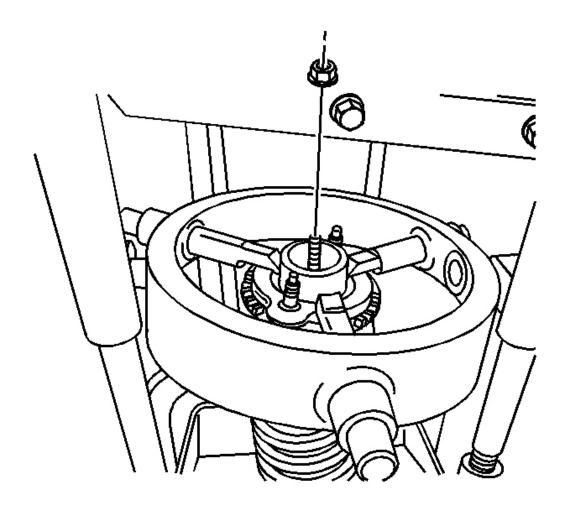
Removing/Installing Shock Absorber Upper Retaining Nut Courtesy of GENERAL MOTORS CORP.
